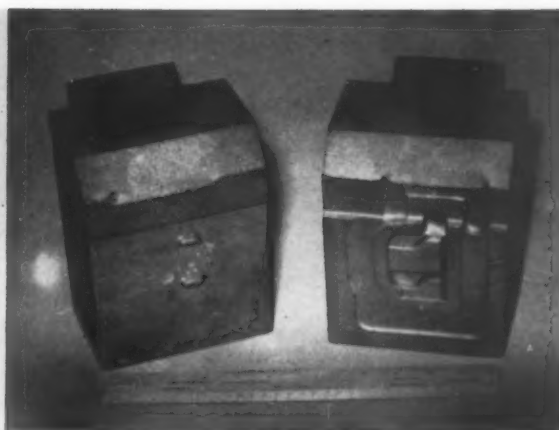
Cast drop-forging dies, about 70 lb each. Steel contains 0.3% C, 1.0 W, 5.0 Cr, and 2.0 Mo.
